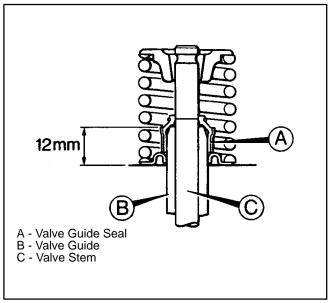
VALVE GUIDE SEAL LOCATION
